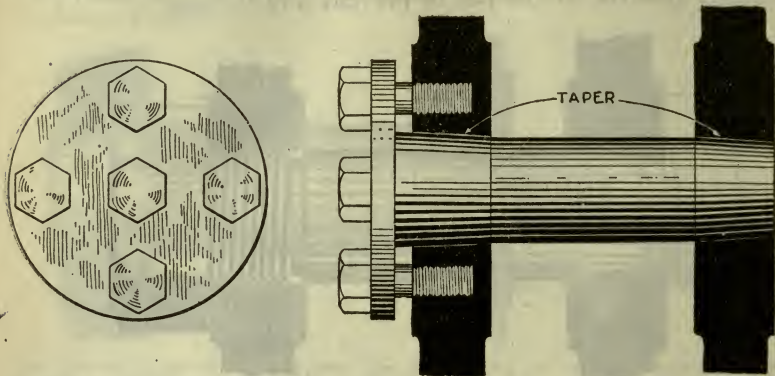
Expanding wrist pin. The ends are split and cylindrical, fitting accurately the holes in the crosshead jaws. An inner or expanding plug having tapered ends is drawn into the hollow wrist pin, thus expanding the ends, and firmly retaining the pin in position, an objectionable construction.
